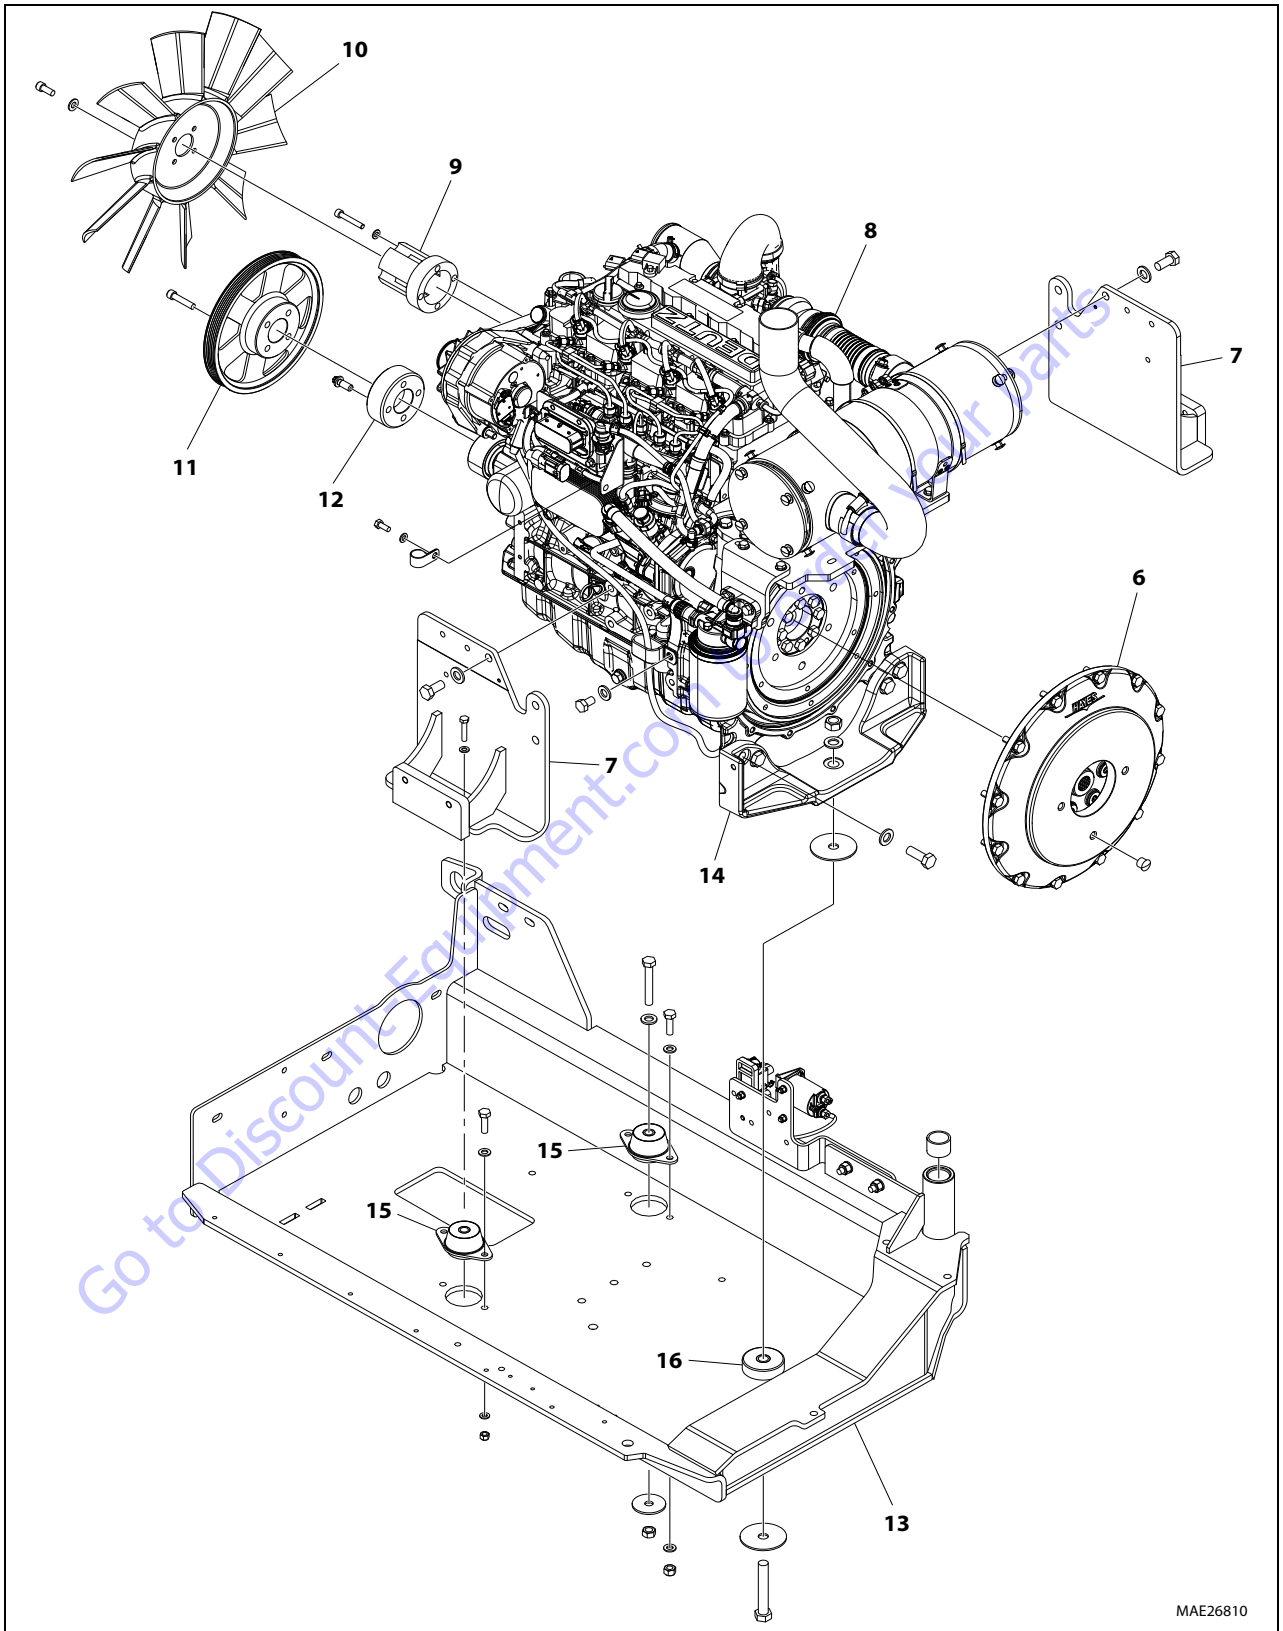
Deutz TD 2.9 L4 GUO III Engine Assembly - Sheet 2 of 2
